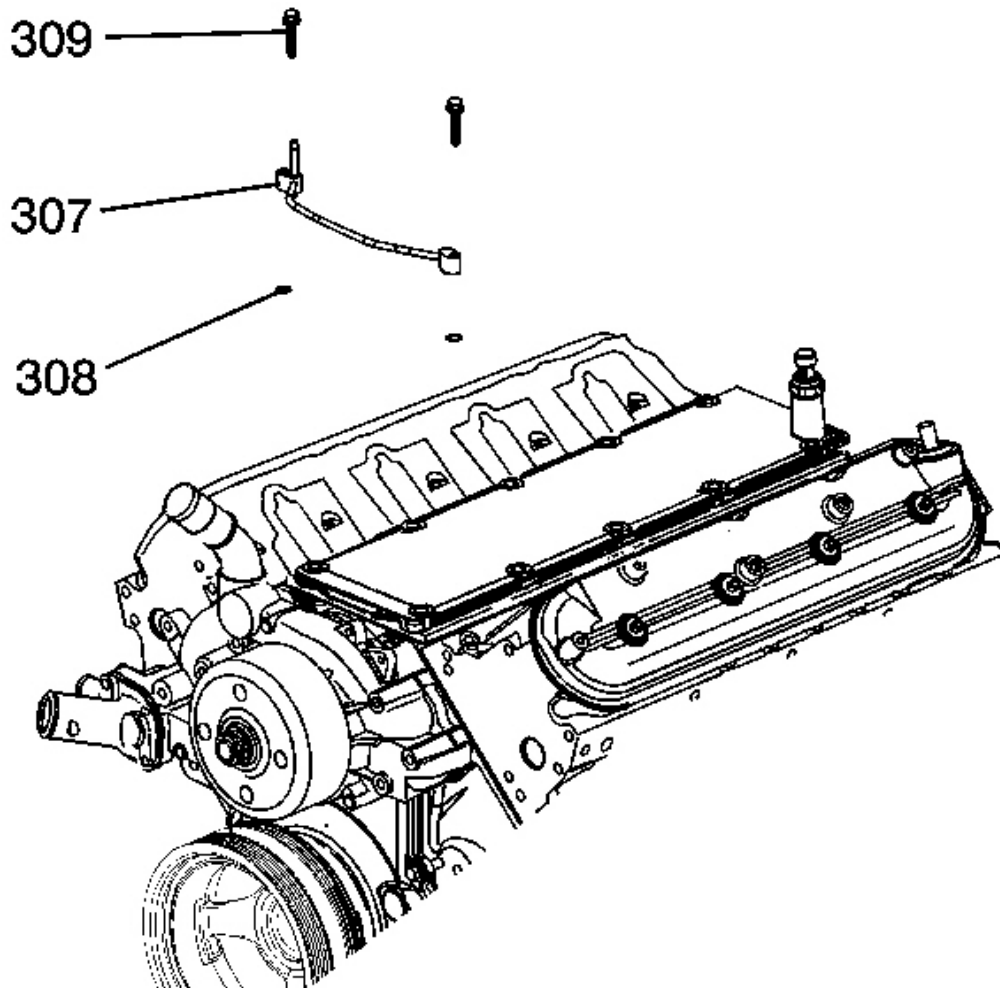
Identifying Engine Coolant Air Bleed Pipe
